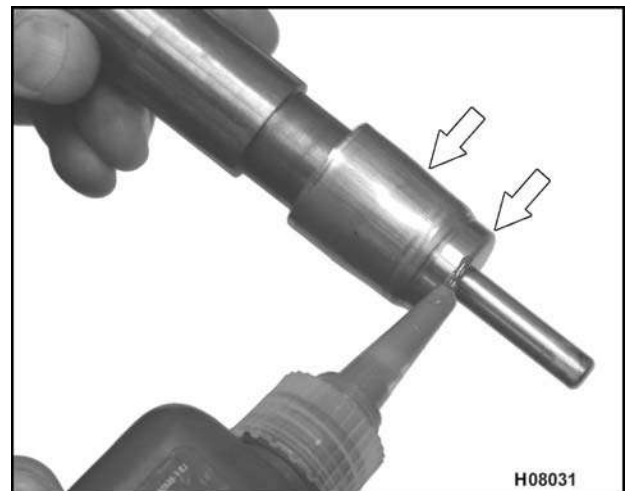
Applying Loctite® 620 sealant to fuel injector sleeve
